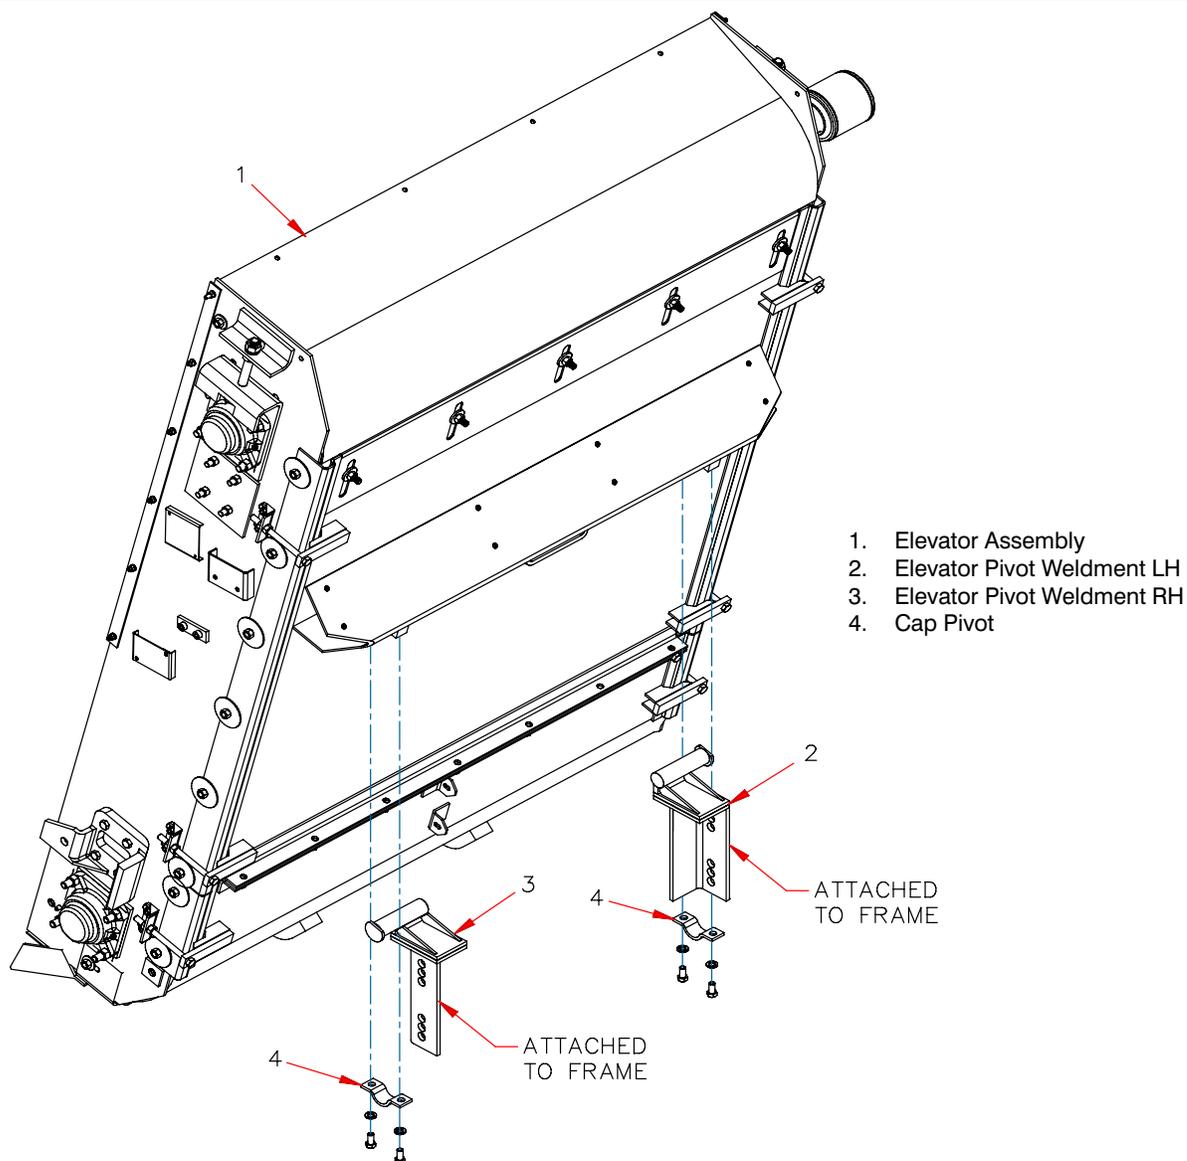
A Removal and installation of the Elevator Assembly requires an overhead crane and a sling to hoist.
